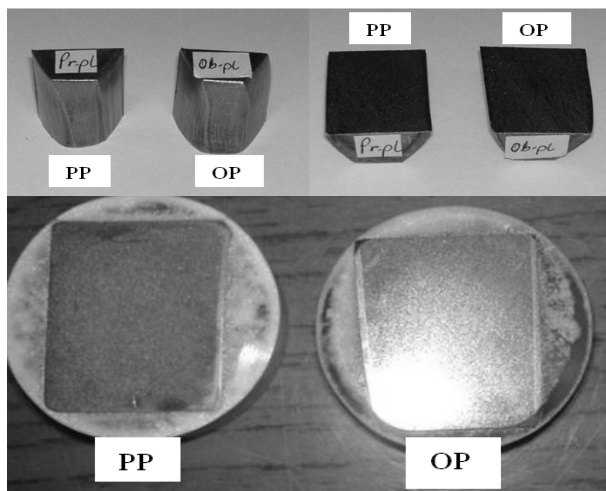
Cog Sample Form with PP and OP, extracted from cog faces before being coated with dentacryle; below dentacryle coated cog samples
